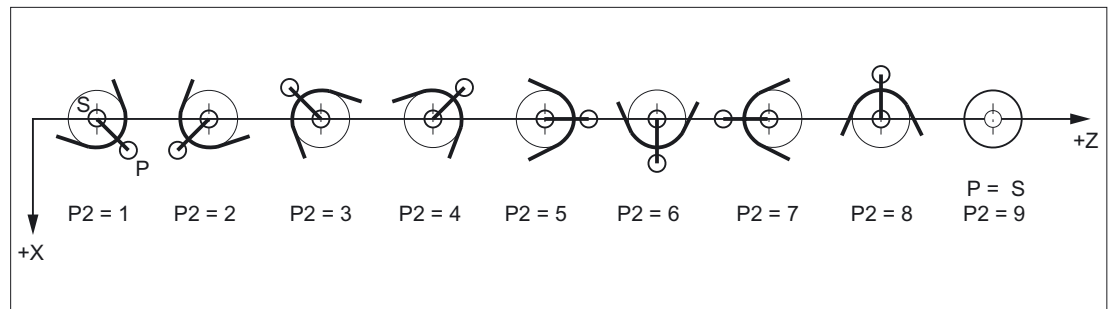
Tool parameter 2 (P2): Machining in front of the turning center
